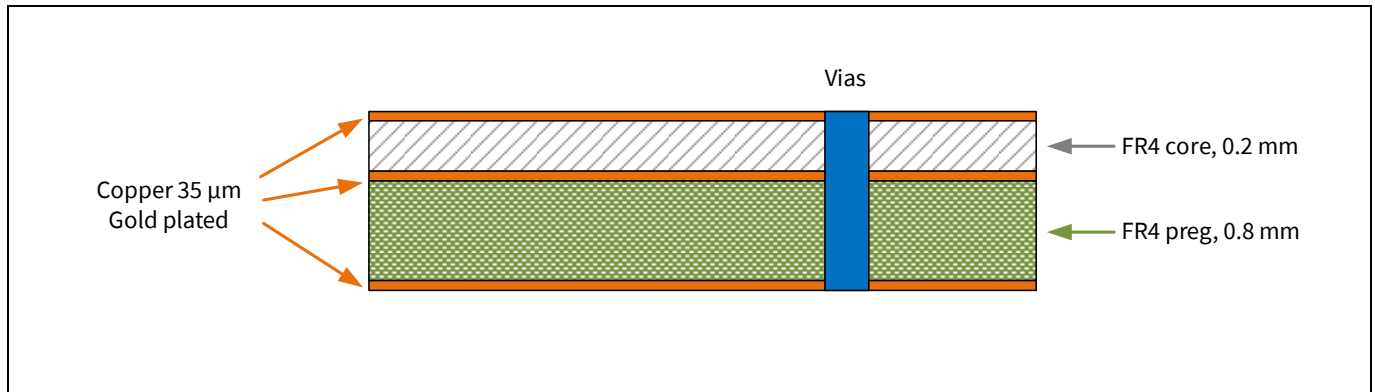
PCB stack information for the evaluation boards with marking M101022 and M18061502
